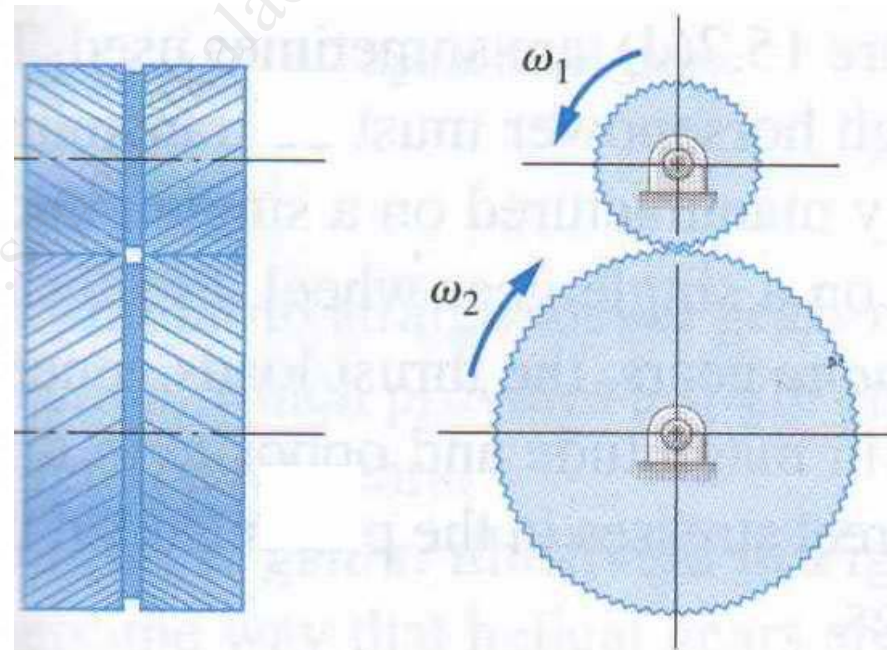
Helical gear and pinion. (Courtesy Mobil Oil Corporation.)
